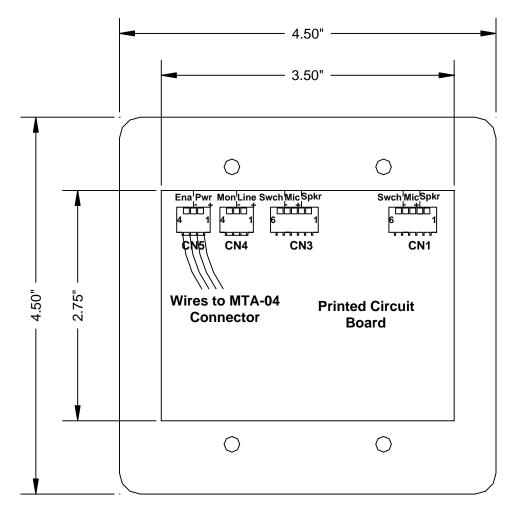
Connector Locations on PC Board of a Primary VBS-420
